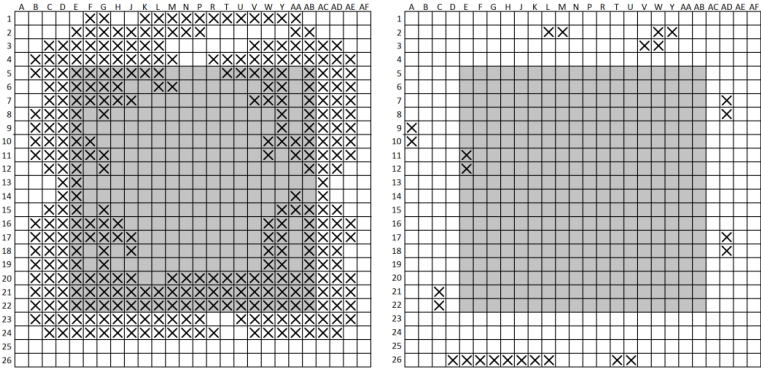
Location of failed solder joints to BGA676 with SnPb solder joints (left image) and SAC305 solder joints (right image). The components were mounted on test boards that were thermally cycled without prior aging. Solder joint pairs with increased resistance or open circuit are marked with x. The grey squares show the size of the chip in the component.
